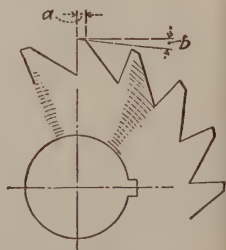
Shows the clearance (b) on the land (a) of a saw tooth of milling cutter.
